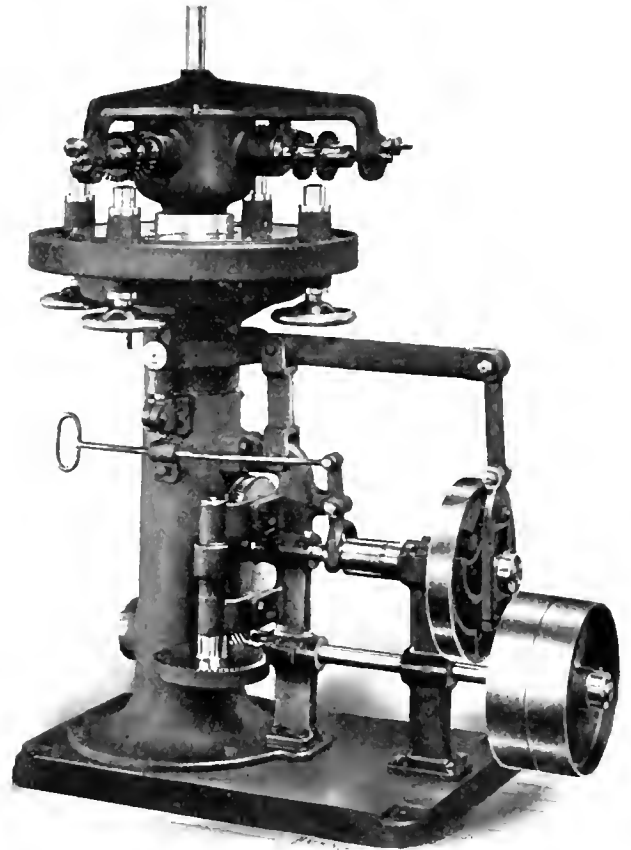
A Machine for Milling Hexagon Surfaces on Valve Bodies, Nuts, etc.
